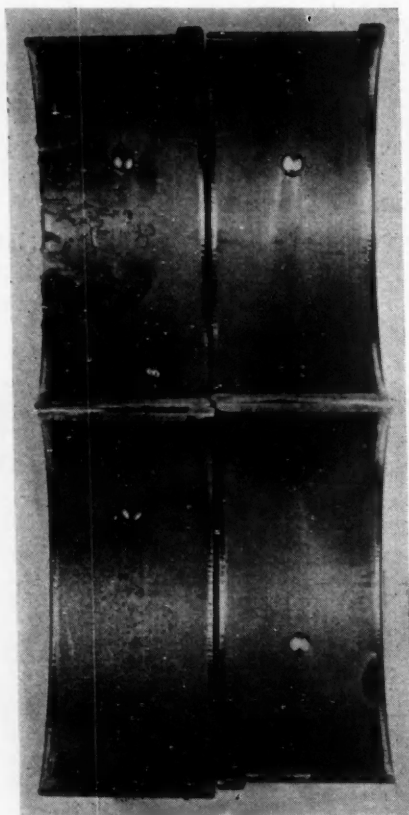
Babbitt after 20 hrs. at 4500 r.p.m. on bearing testing machine
